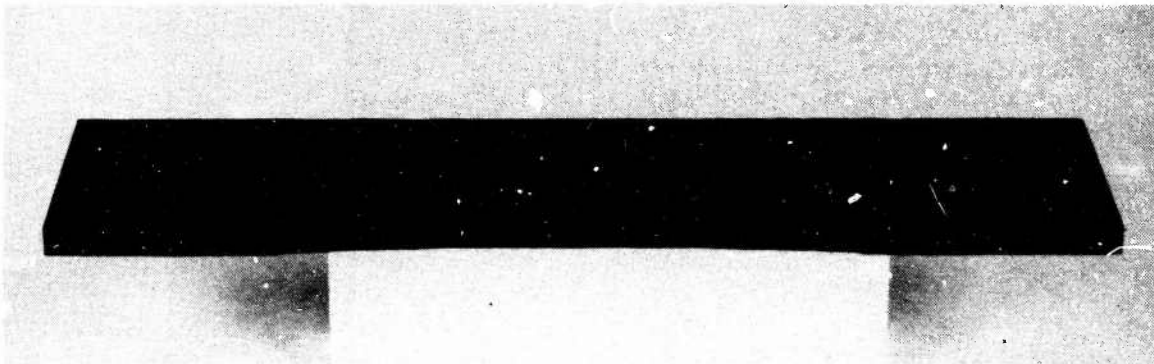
Typical 2.5-in. Wide Tension Joint Specimen
